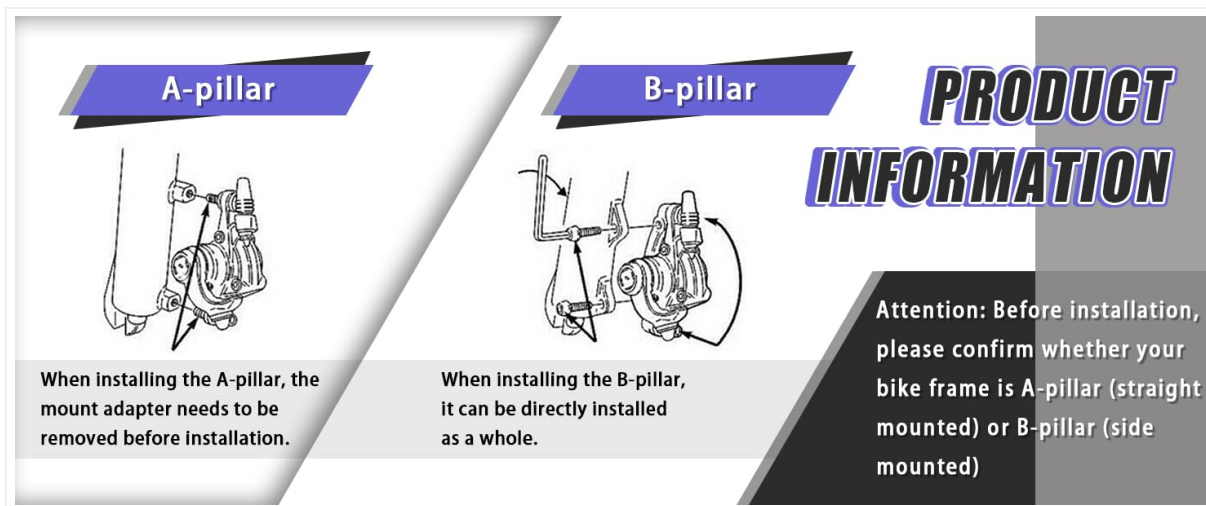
Guide for A-pillar and B-pillar installation. For A-pillar mounting, the mount adapter must be removed. For B-pillar mounting, the caliper can be installed as a whole unit directly.
